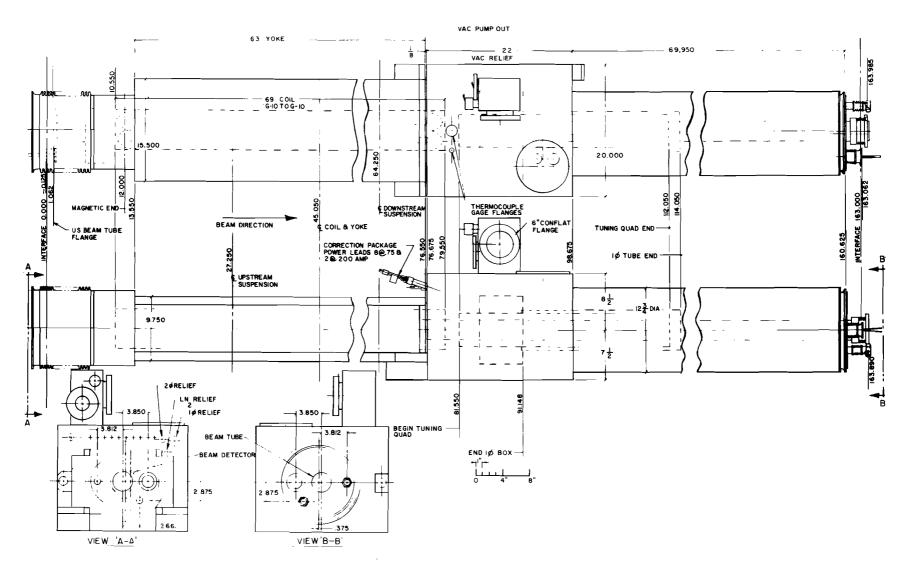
Cross sections of quadrupole and spoolpiece assembly.
